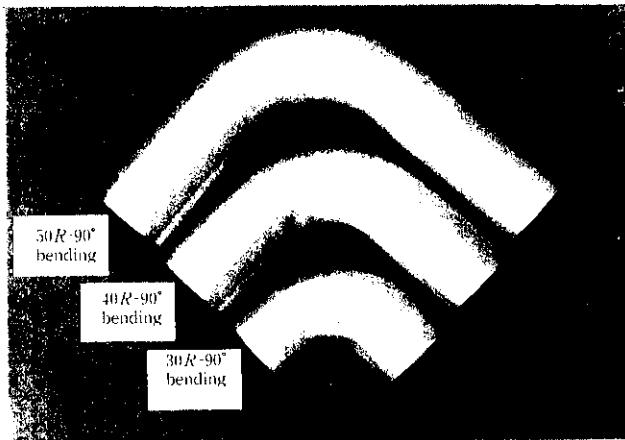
Appearance of pipes produced by CBR mill after 90° bending (38.1 mm ϕ × 2.0 mm t , R409L)
